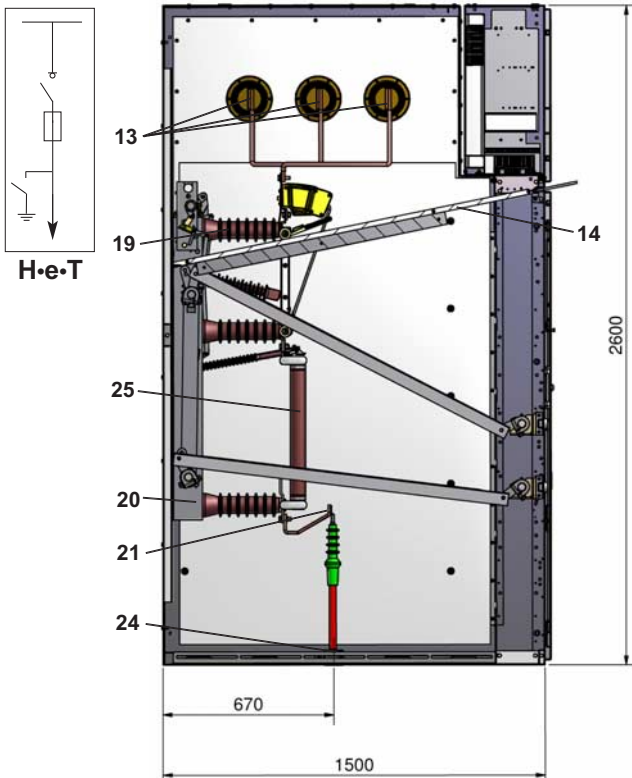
PRO-AIR H•e•T, Type transformer feeder panel, 1250 A busbar
